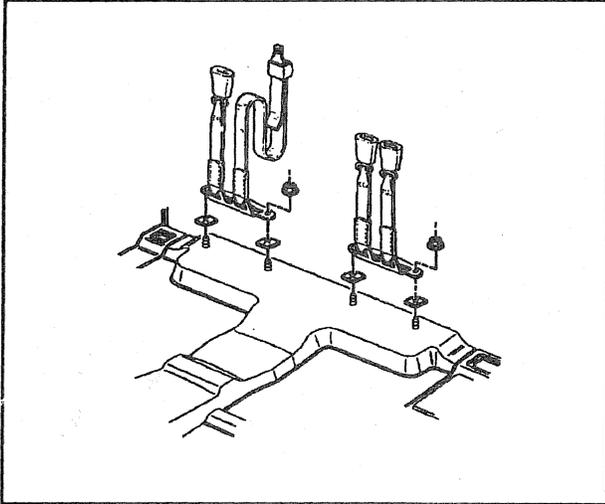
Rear Seat Belts (Crew Cab with Folding Rear Seat)
